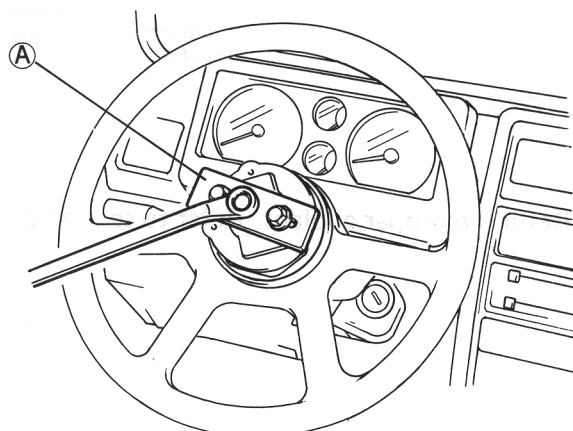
(A) Special tool (Steering wheel remover 09944-360 10)
